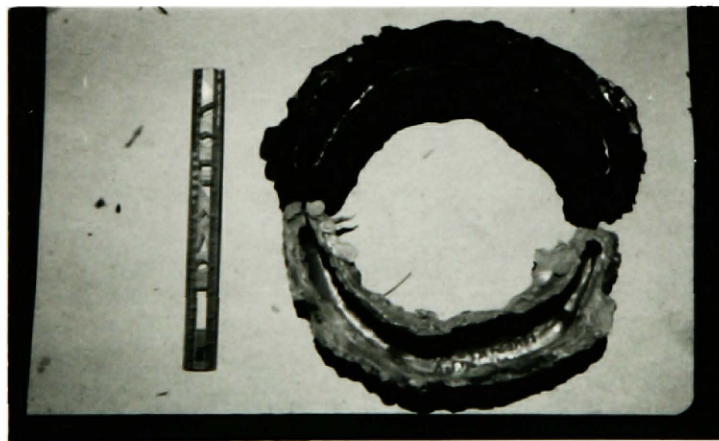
Two-part rubber mold requiring no acrylic plugs.
